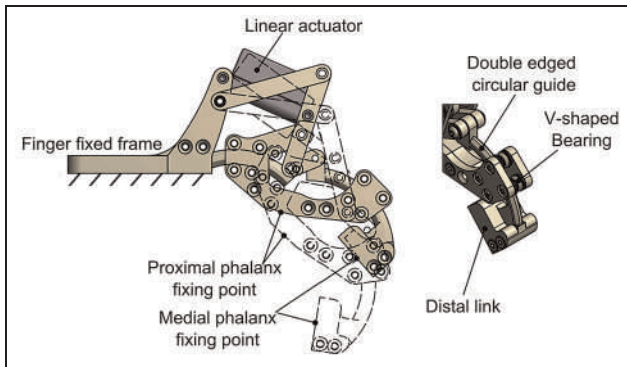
Left: Finger module represented in its extreme positions. Right: Detailed view of the designed circular guide to minimize mechanical clearances with minimum friction.
